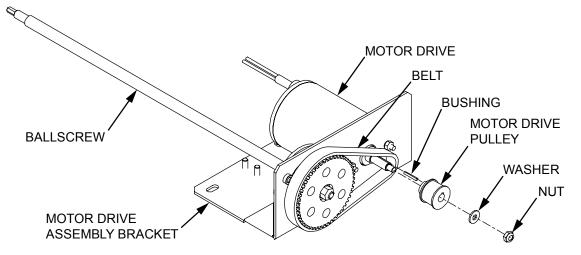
MOTOR DRIVE ASSEMBLY
